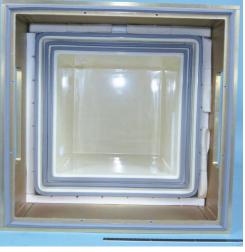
TEHOF Shell Assembly, Rear Plate
